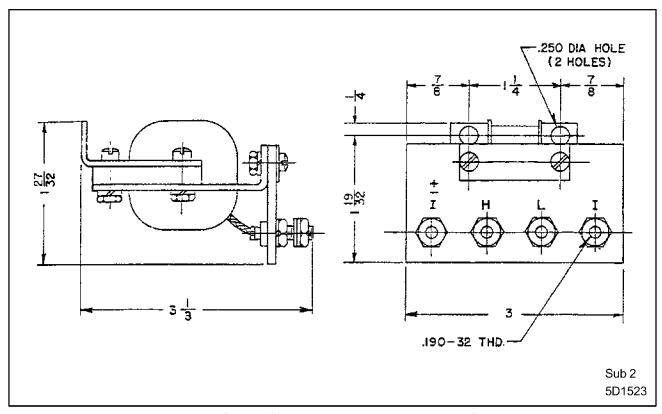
Outline of the Test Milliammeter Auxiliary Transformer.
